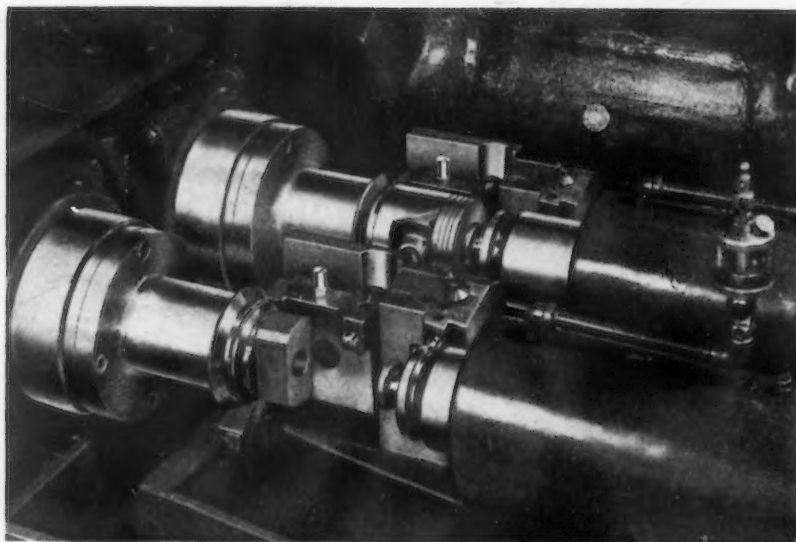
Close-up view of the turning units and fixture, showing cam arrangement for turning the pistons.
